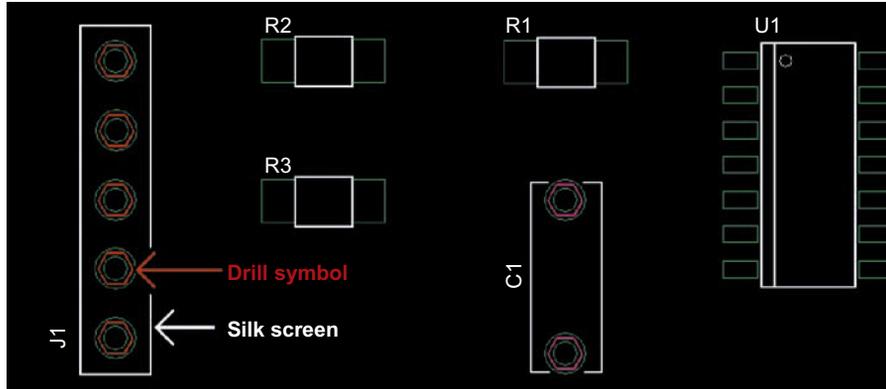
Circuit layout with drill symbols and silk screen on a PCB.
